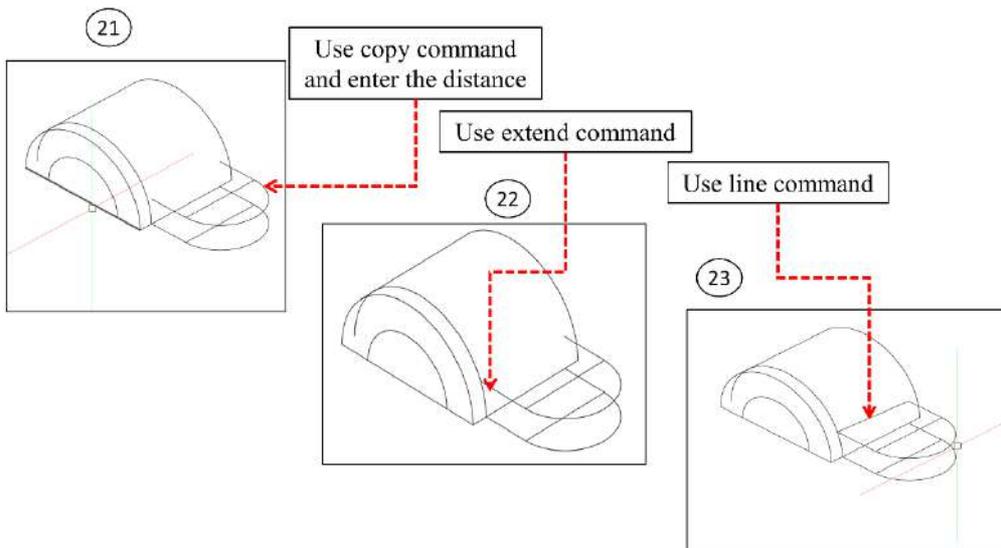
Example of an isometric drawing (Step 21, 22 and 23)
